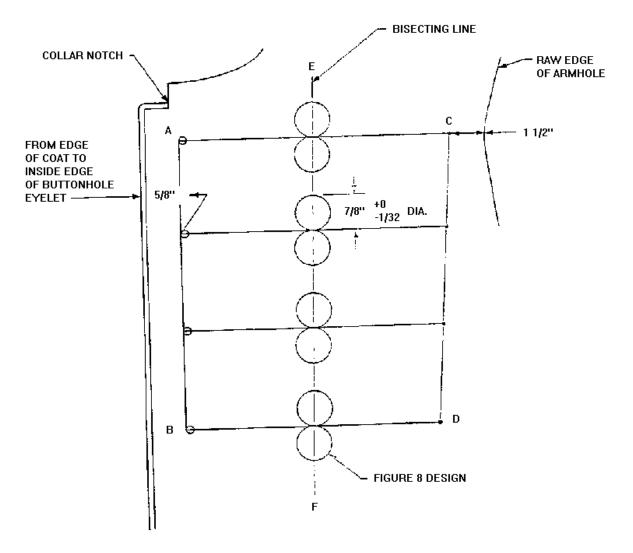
Coat, Man's - Summer and Winter, Scarlet, Drum and Bugle Corps, Drum Major and Director
